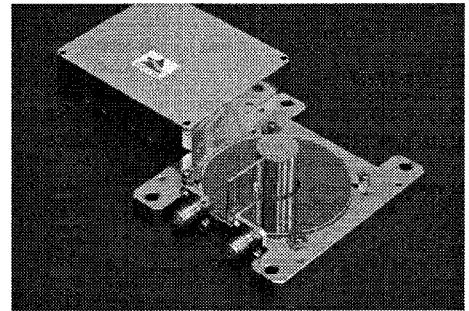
Photograph of the package assembled with shields for the 8-pole filter.
